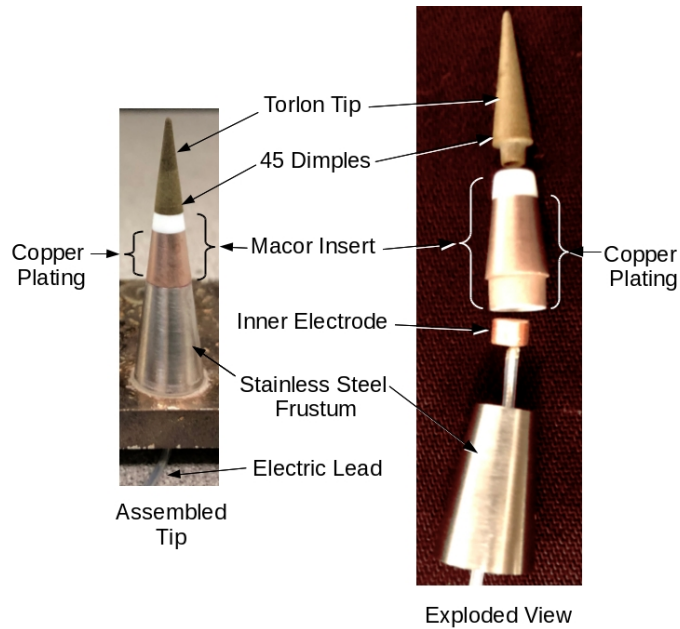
Photographs of exploded assembly view and fully assembled view of cone tip that combines dimples for stationary mode forcing and a plasma ring for traveling mode forcing.
